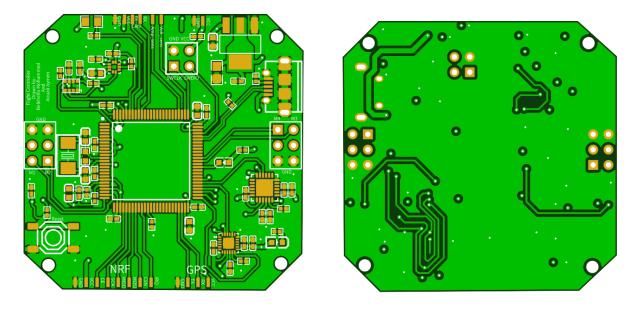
2D Pcb flight Controller Top and Bottom View
